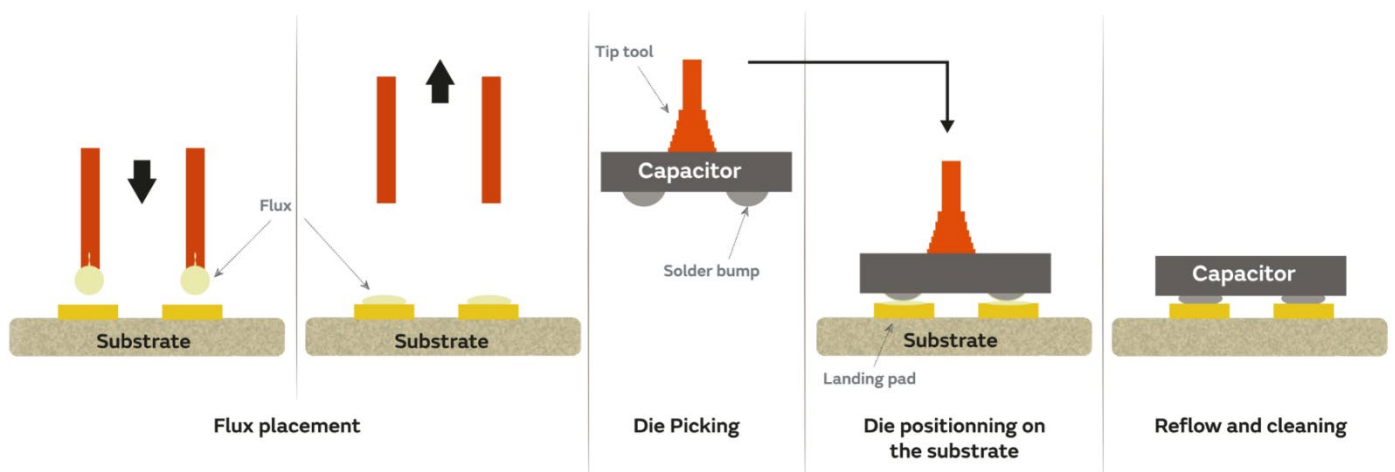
Assembly process by flux stamping on bumped capacitor with SAC305 terminations
